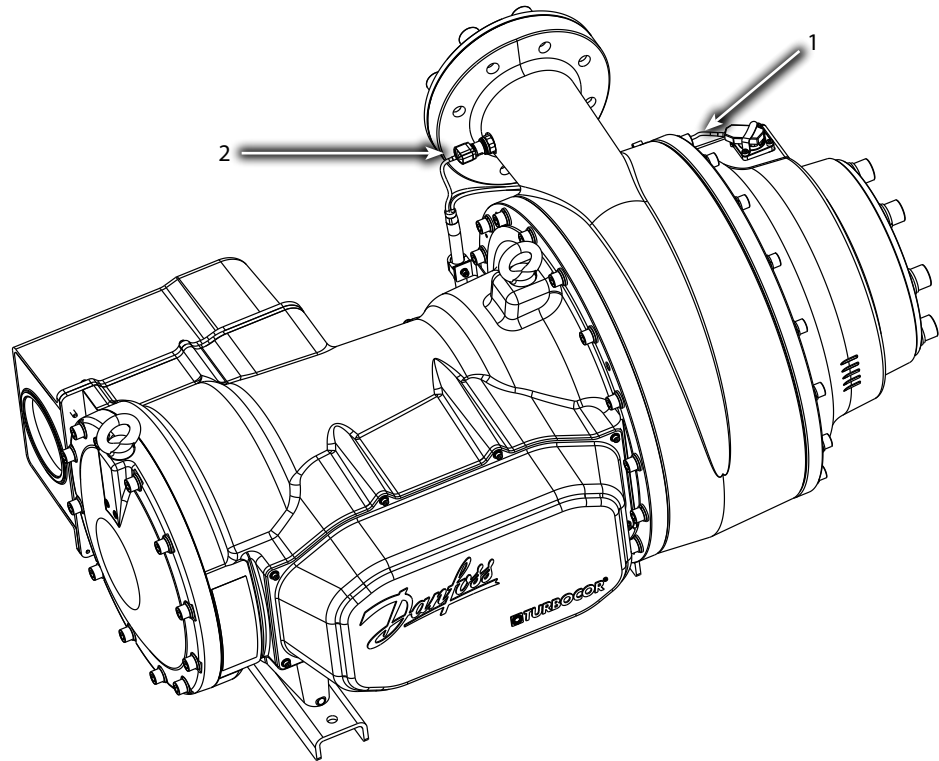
Compressor Sensors and Cables Topside - VTX
